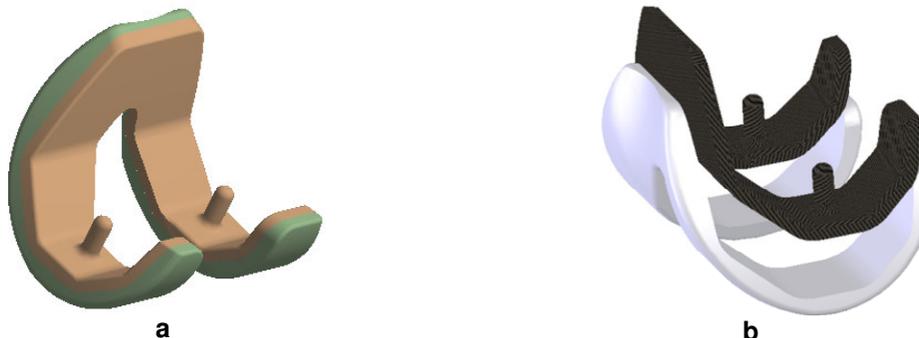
CAD depiction of hybrid CF/PA-12 lining on femoral component; a) Assembled view, b) Exploded view
